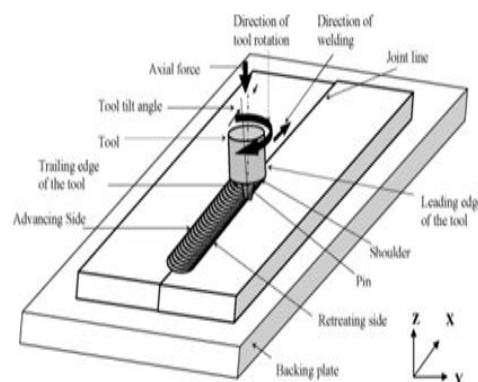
Schematic layout of friction-stir welding process and terminology
